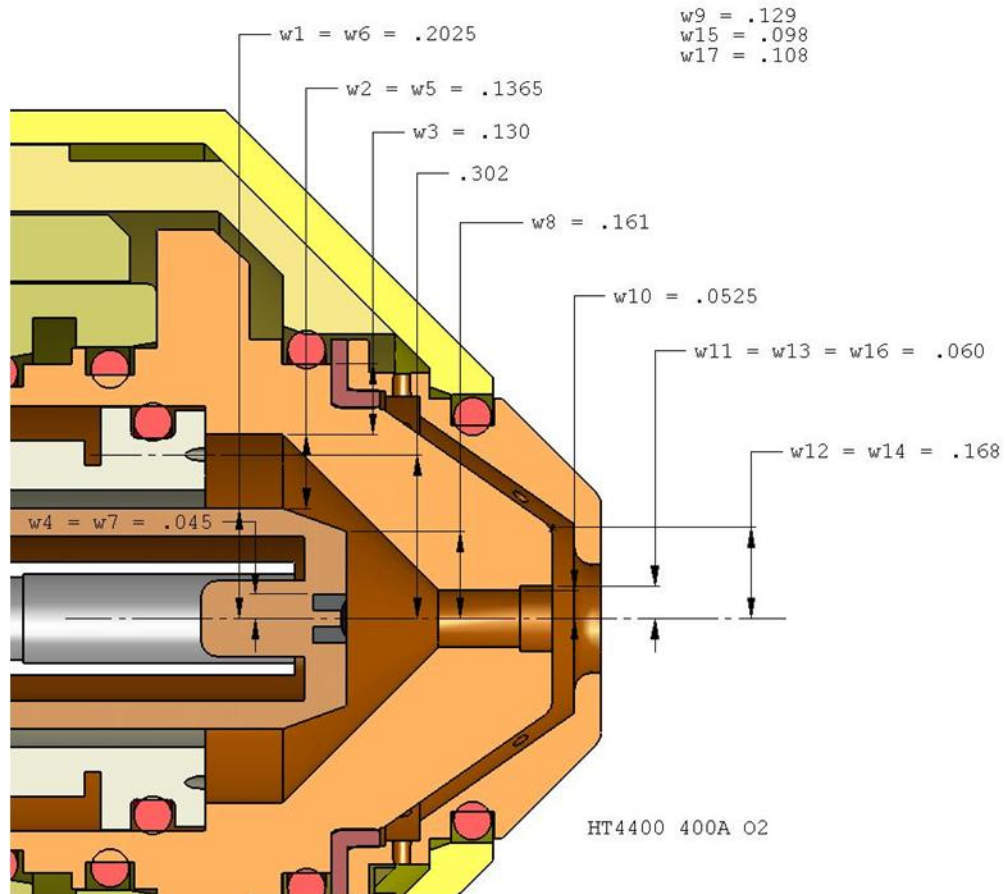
Section of HT4400 with radial dimensions (in mm)
